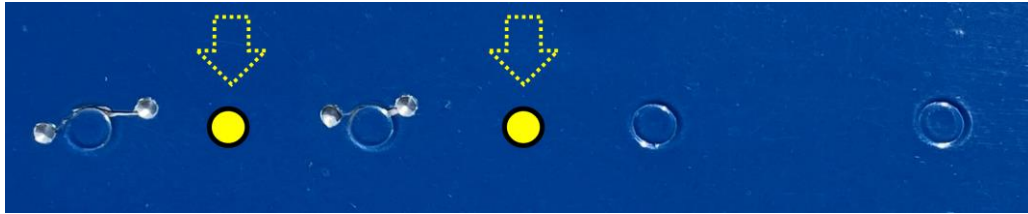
LOCATIONS WHERE RIVETS SHOULD BE INSTALLED
